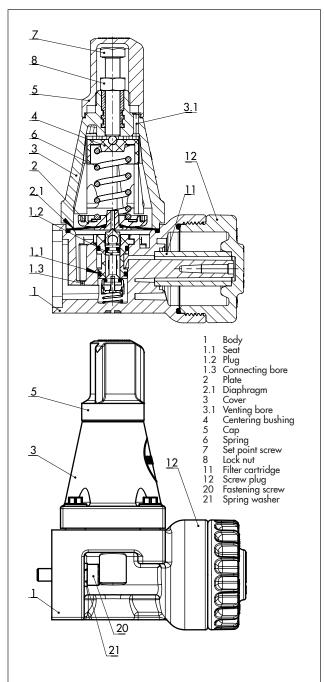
Side view and sectional drawing of Type 4708 Supply Pressure Regulator
